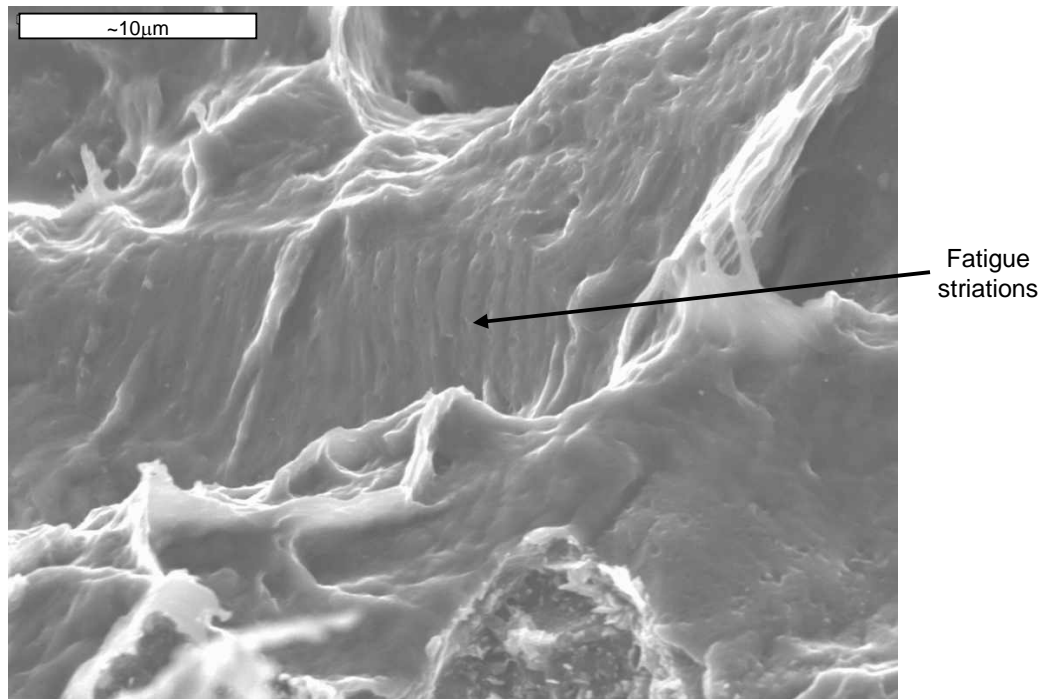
Replica of fracture surface towards end of leading edge crack.
